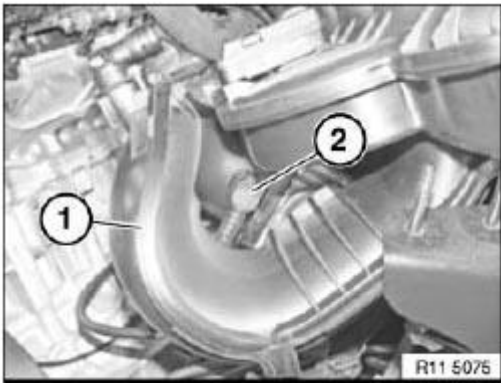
Identifying Tank Venting Connection And Air Intake Manifold
